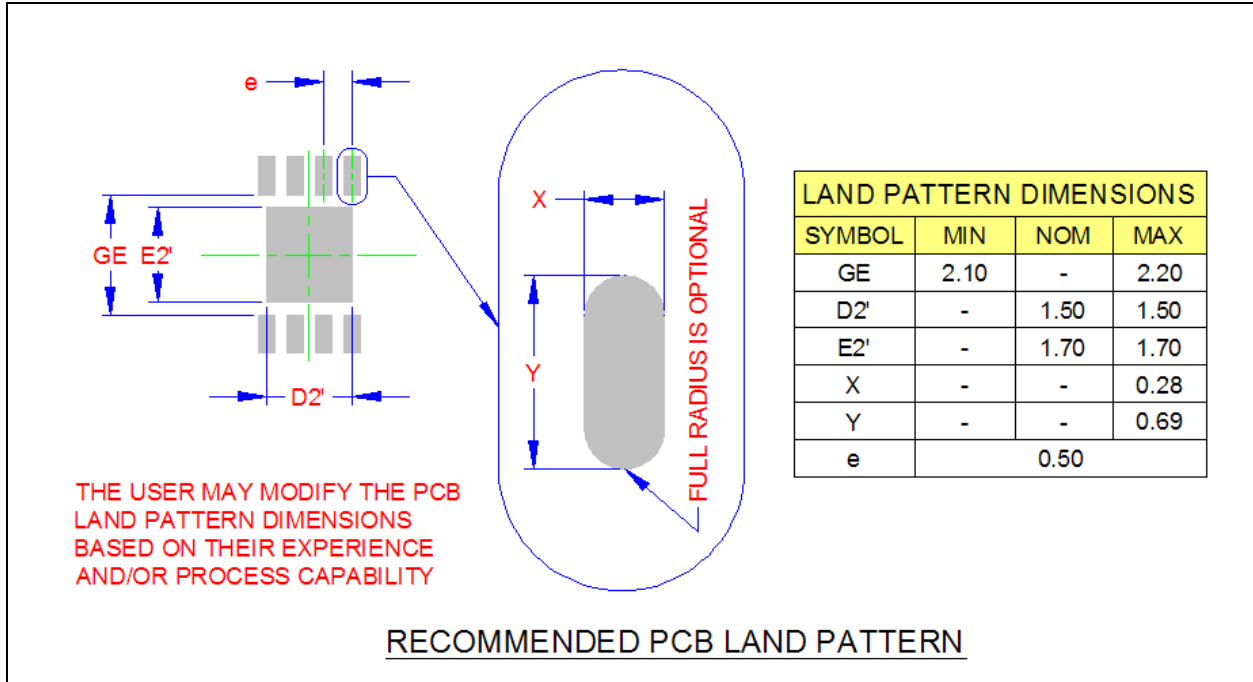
2mm x 3mm TDFN-8 Package Drawing
